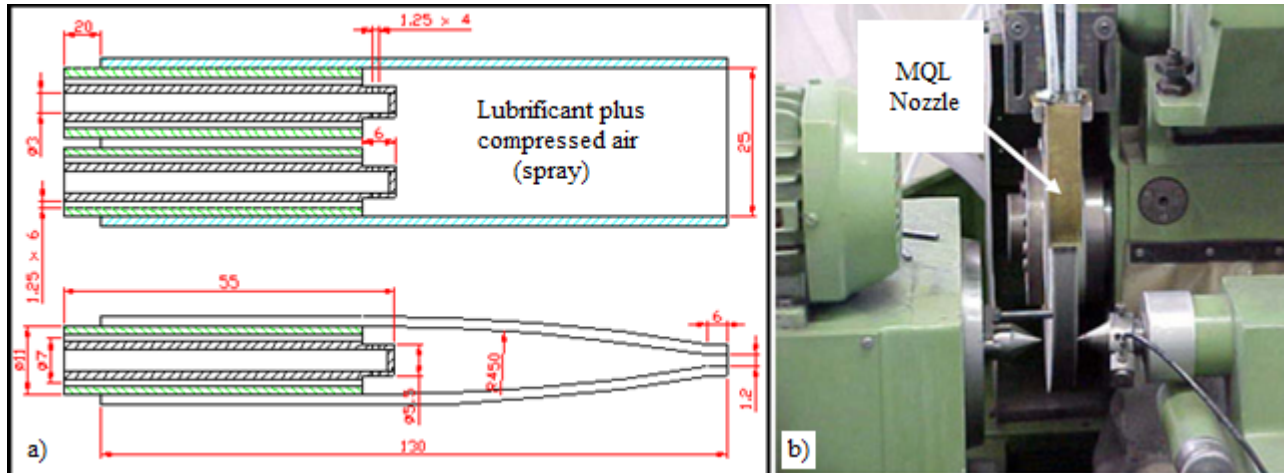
(a) Design of the nozzle (mm) used in MQL tests (b) Setup showing the location of the nozzle relative to the grinding wheel and workpiece.
